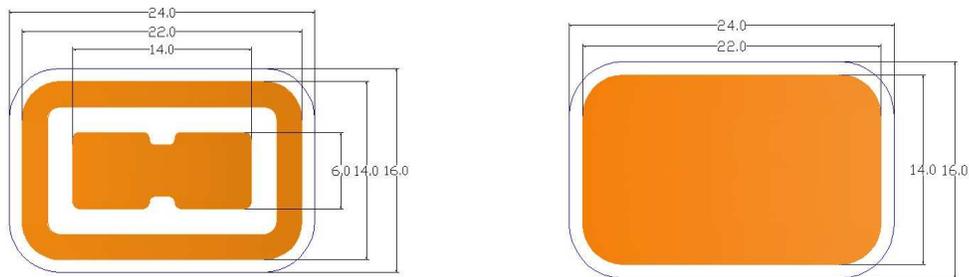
AutoCAD drawing of top substrate layout (unit: mm)
